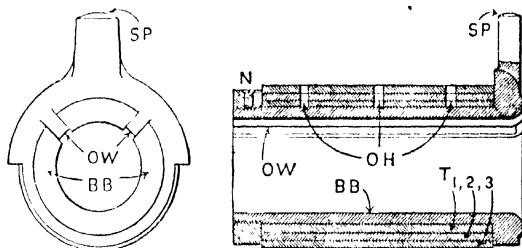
GENERAL FORM OF FLEXIBLE BEARING FOR PARSONS' TURBINE.
